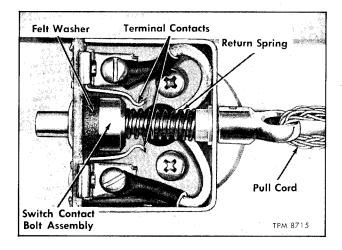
Passenger Signal Chime Cord Switch—Cover Removed
